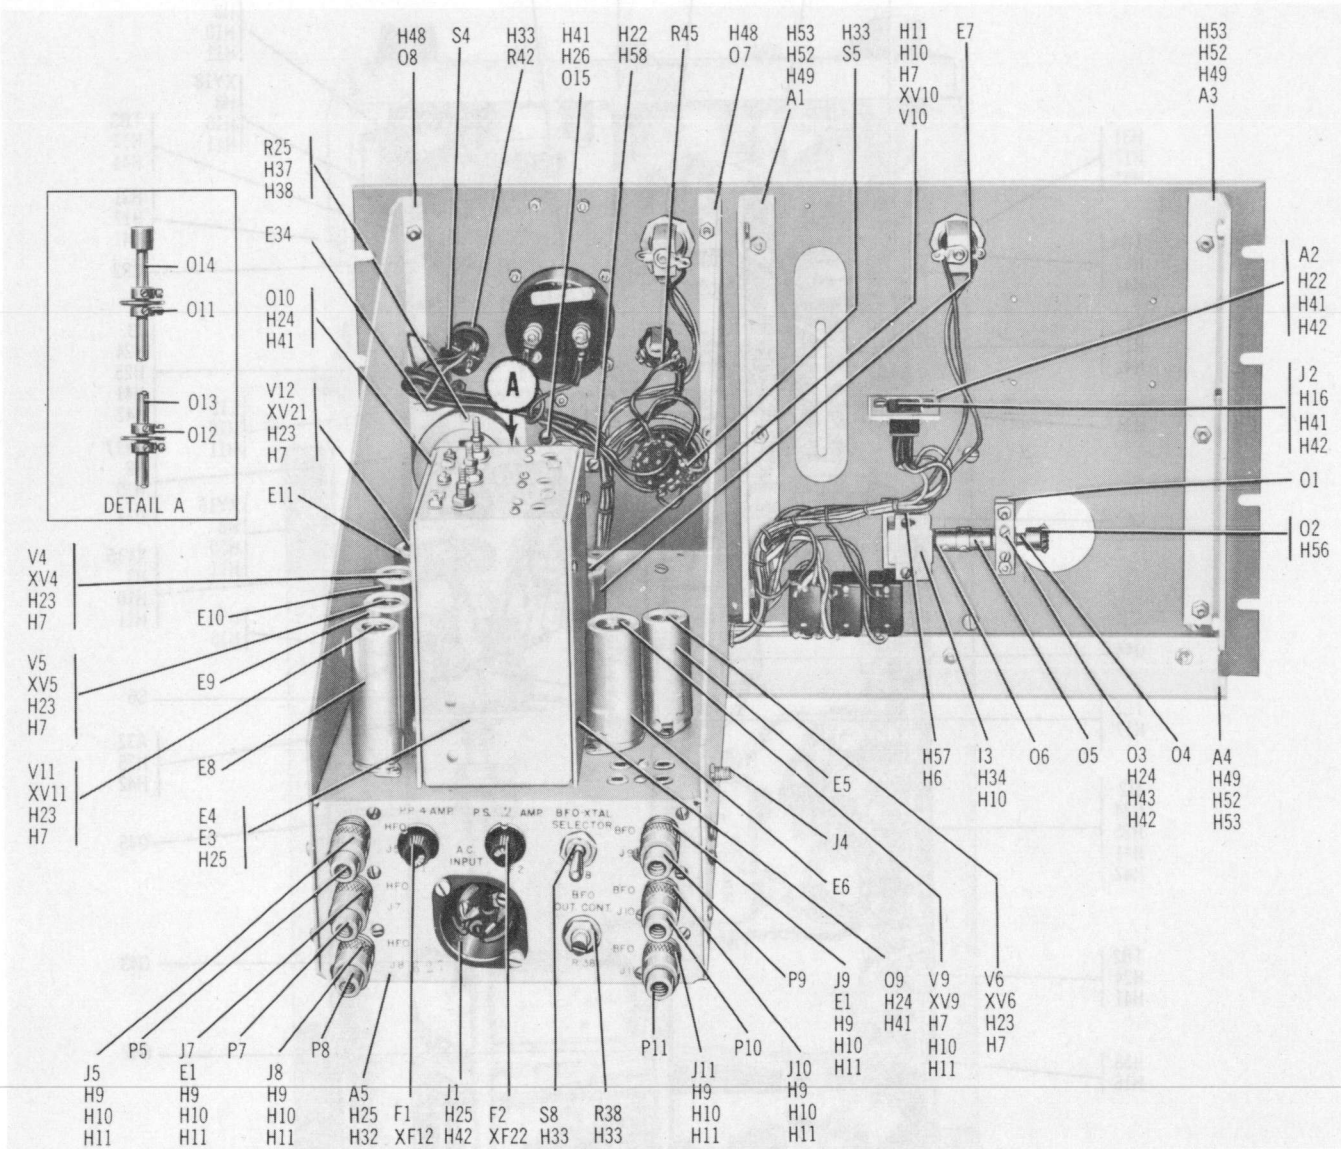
Front Panel and Chassis Assembly (E37), Rear View
